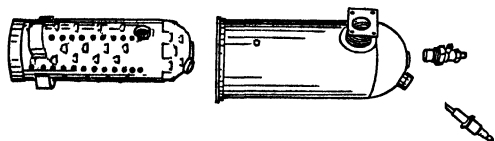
Can-type combustion chamber, showing inner liner, outer casing, fuel nozzle, and spark plug.
